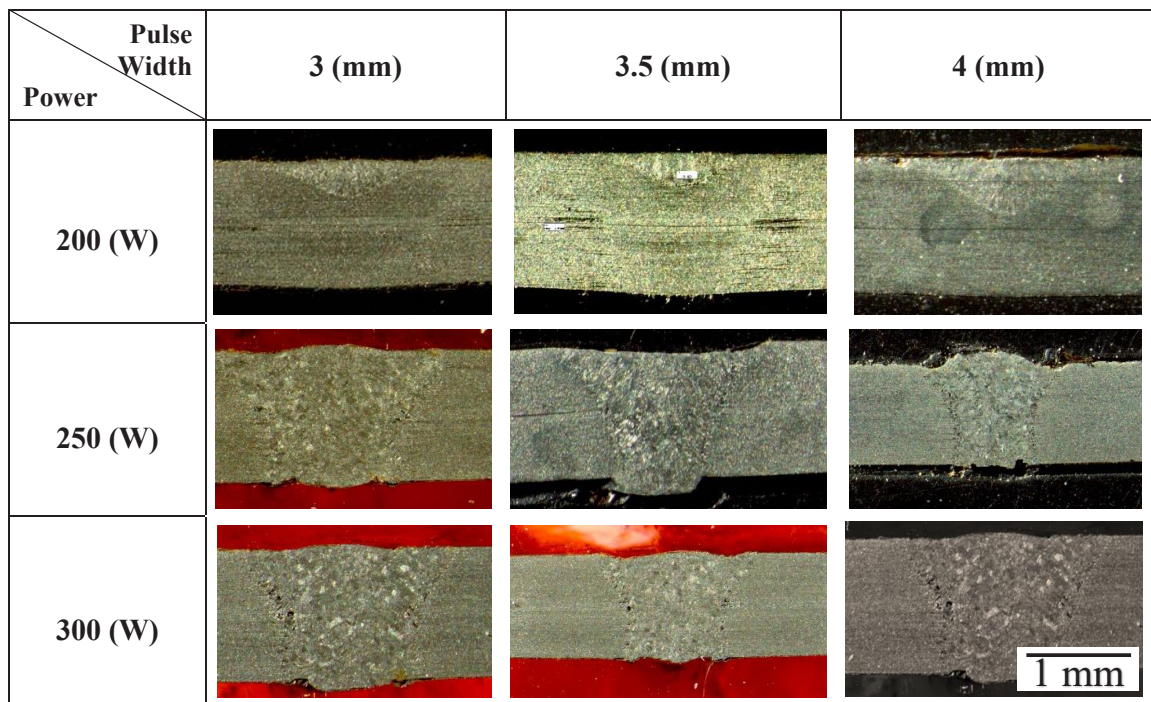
Weld depth and width with a constant welding speed of 2mm/s.
